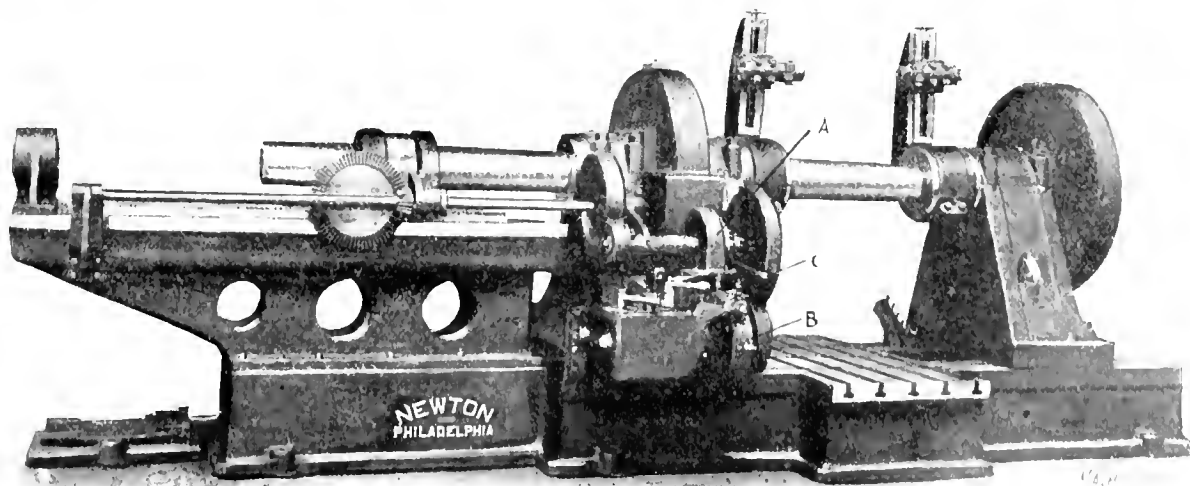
Front View of the Latest Design of Newton Cylinder Boring Machine
